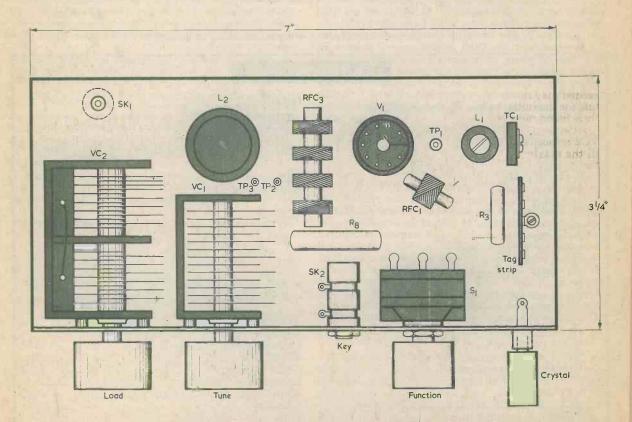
General layout of the principal components in the transmitter. Further details are given in the text
